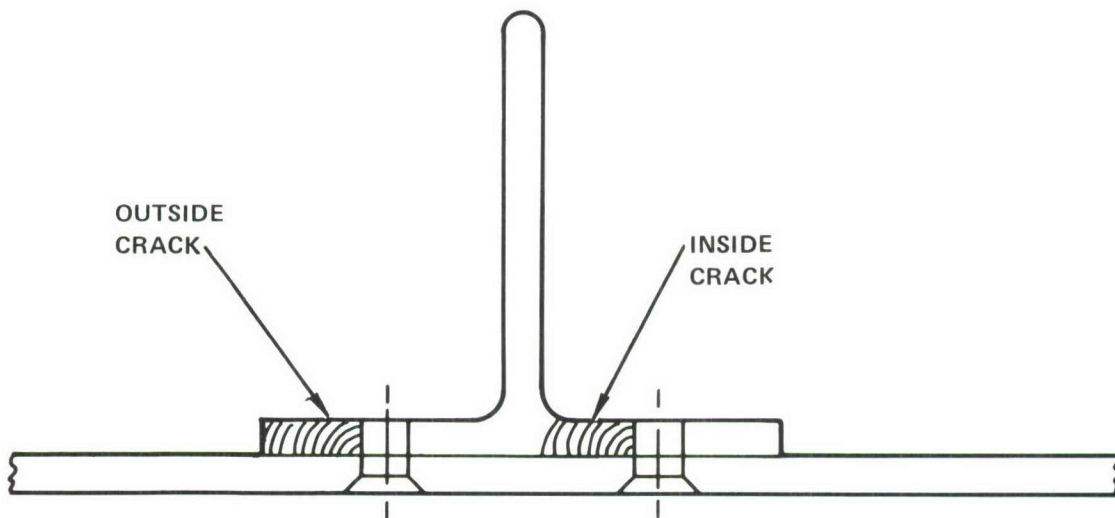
Inside Cracks and Outside Cracks in the Stringer
